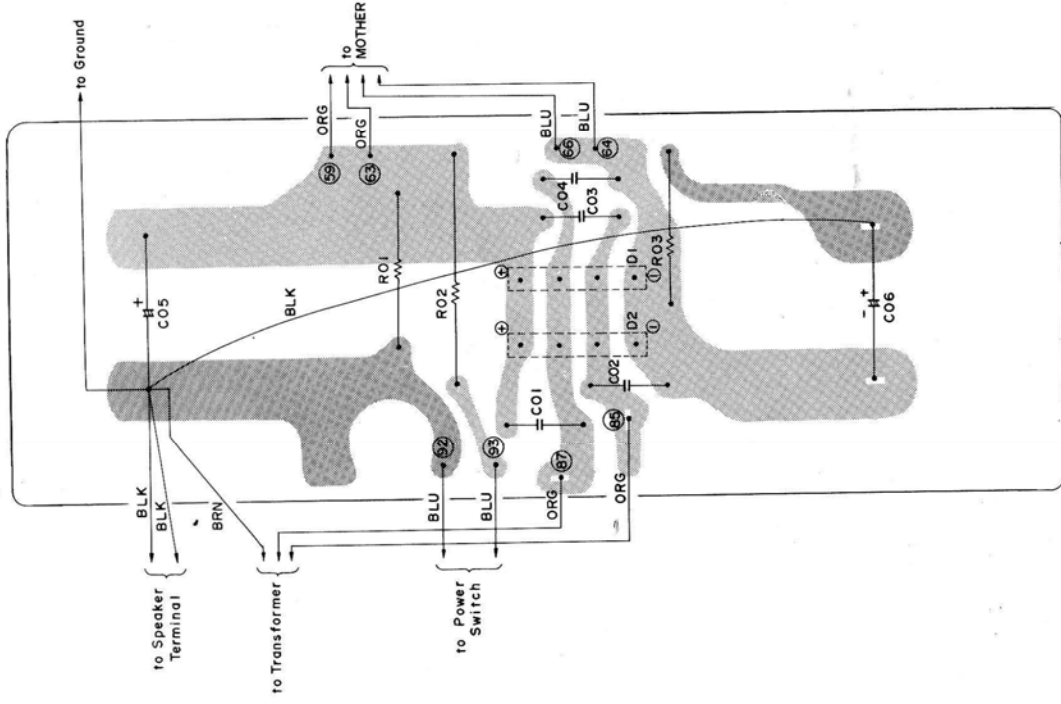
Solder Side of Power Supply Amplifier P.C. Board (SPLY-C33)
